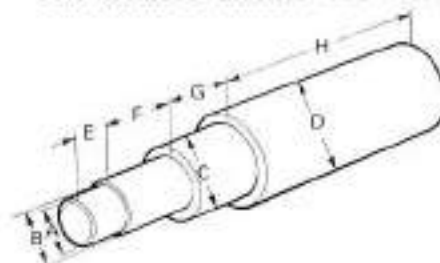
When installing clutch in Models 885 and 995, use a pilot made to the dimensions shown in legend.
